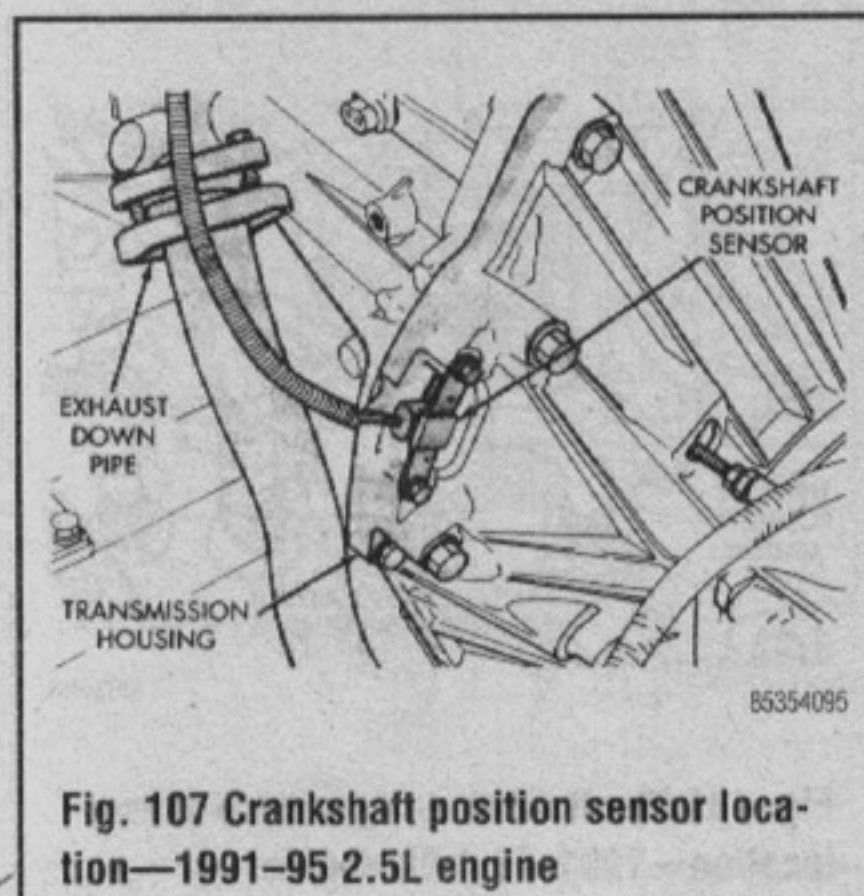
Crankshaft position sensor location—1991–95 2.5L engine
